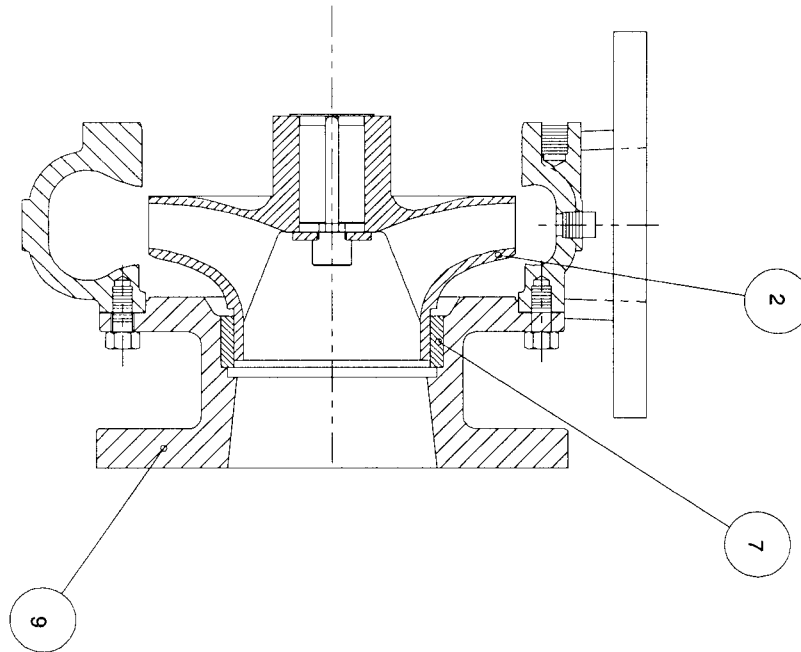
Pump Sectional Drawing (Sheet 1 of 2)
